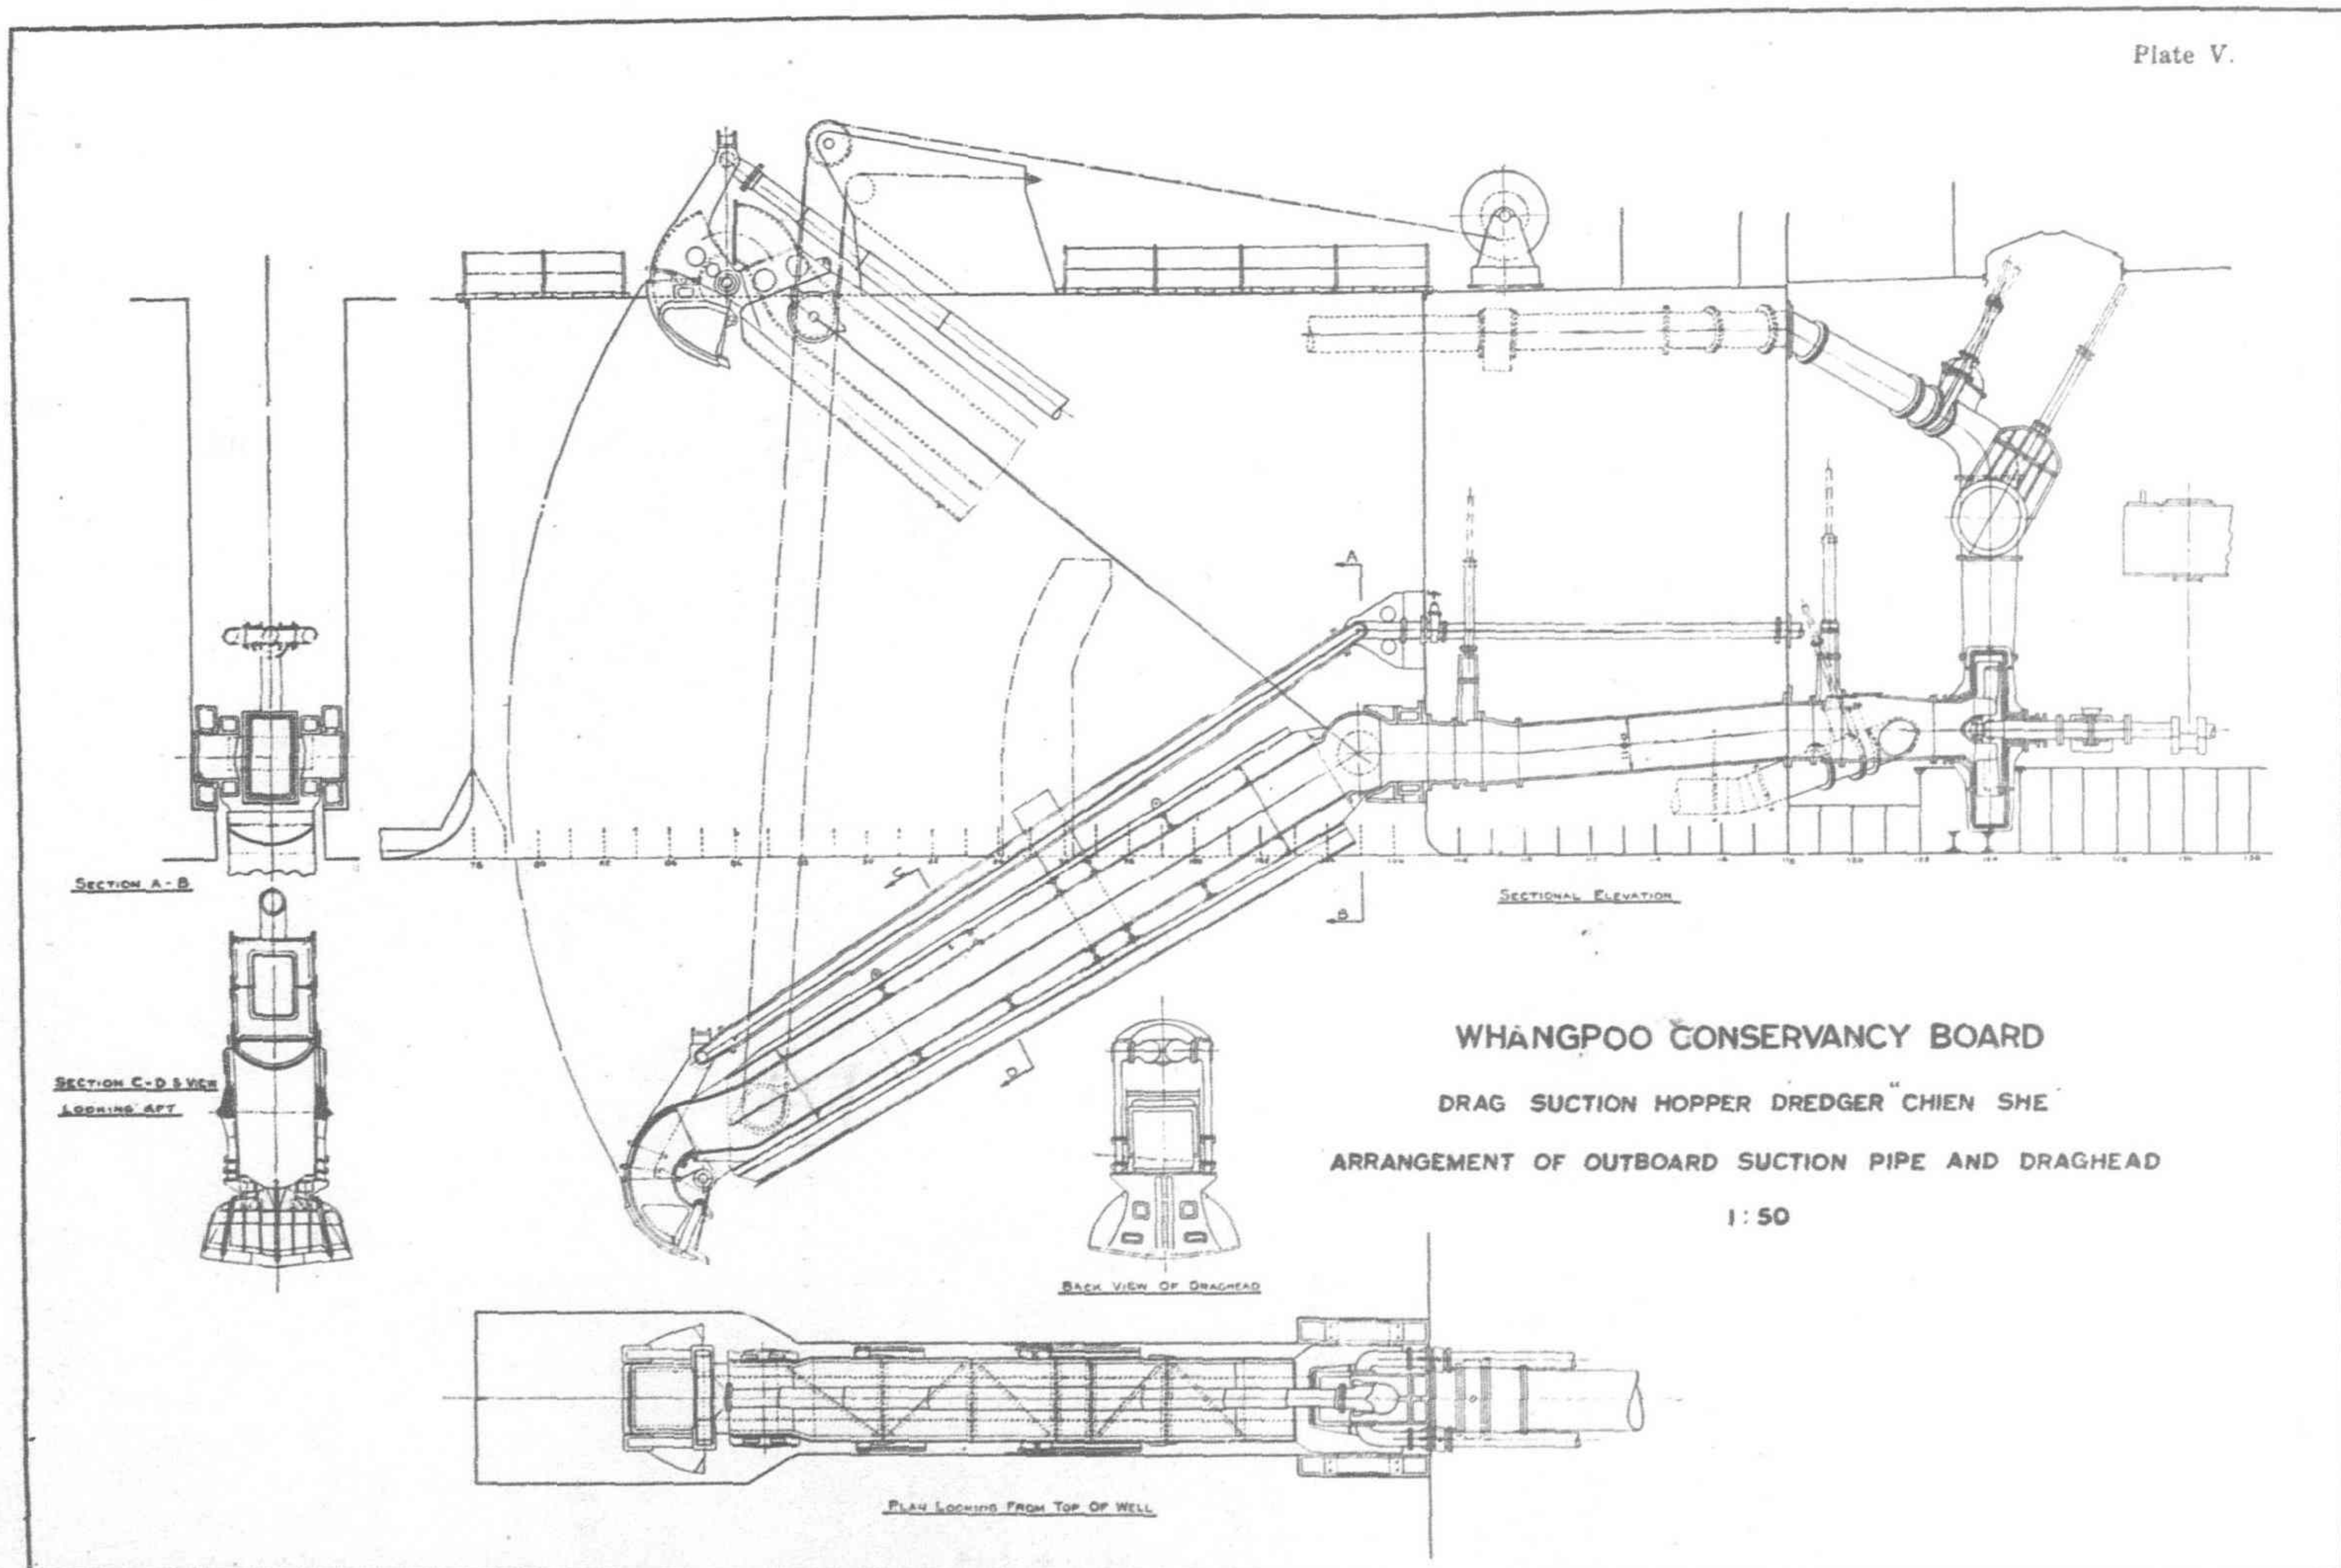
Plate V.—General arrangement of the outboard equipment together with the pipe line and hydraulic sluice valves in connection with the dredging pump
